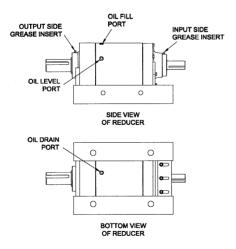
Reducer Oil Ports and Grease Insert Locations
